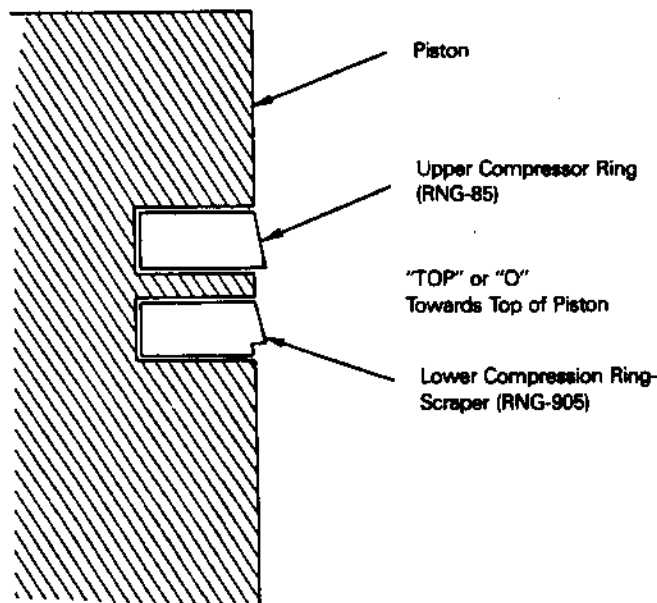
Replacement Piston Ring Set (RNG-77) for 2-Ring Pistons
